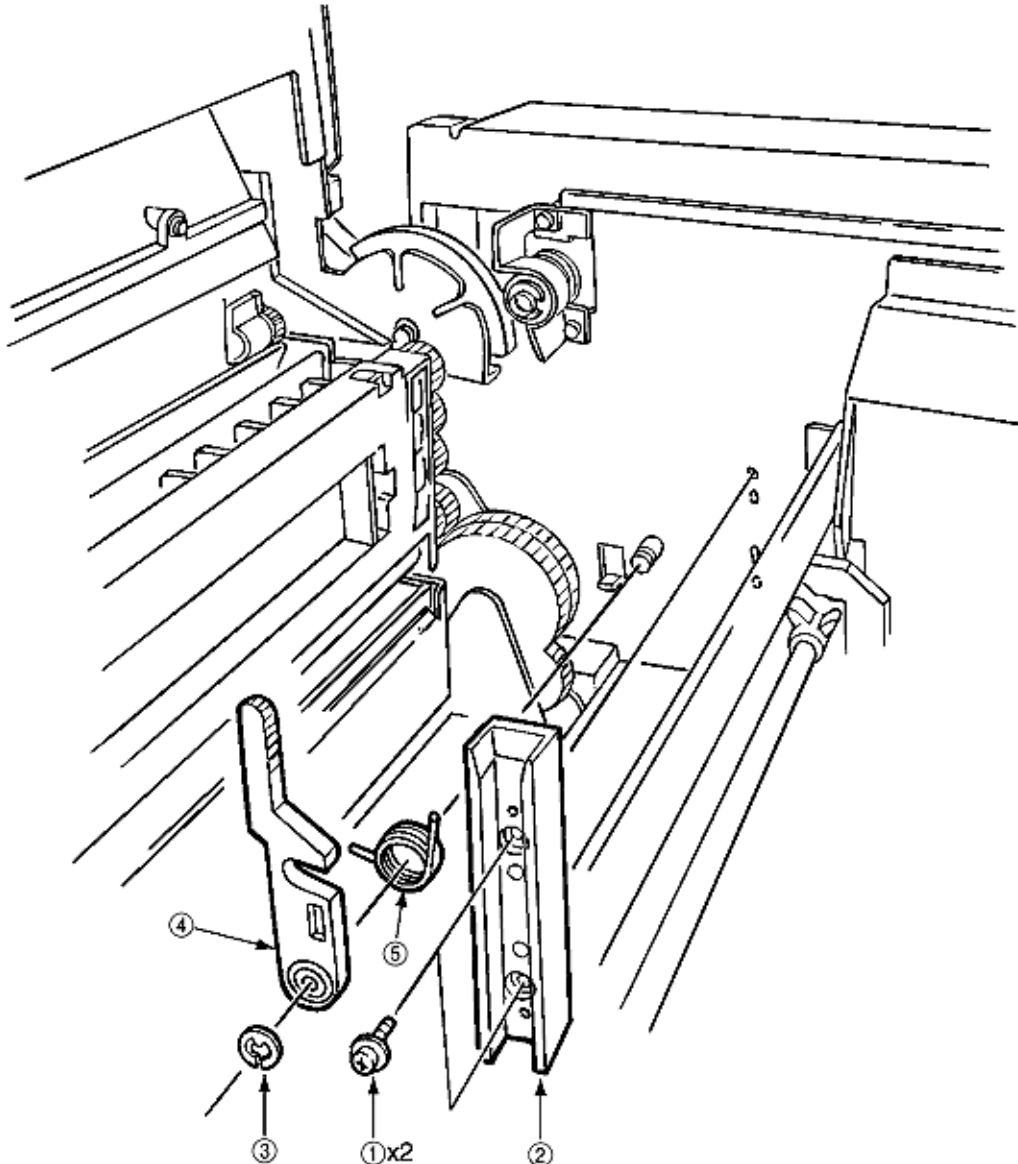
Lever Lock Heat (L)/(R), Guide Side Heat, Spring Lock
